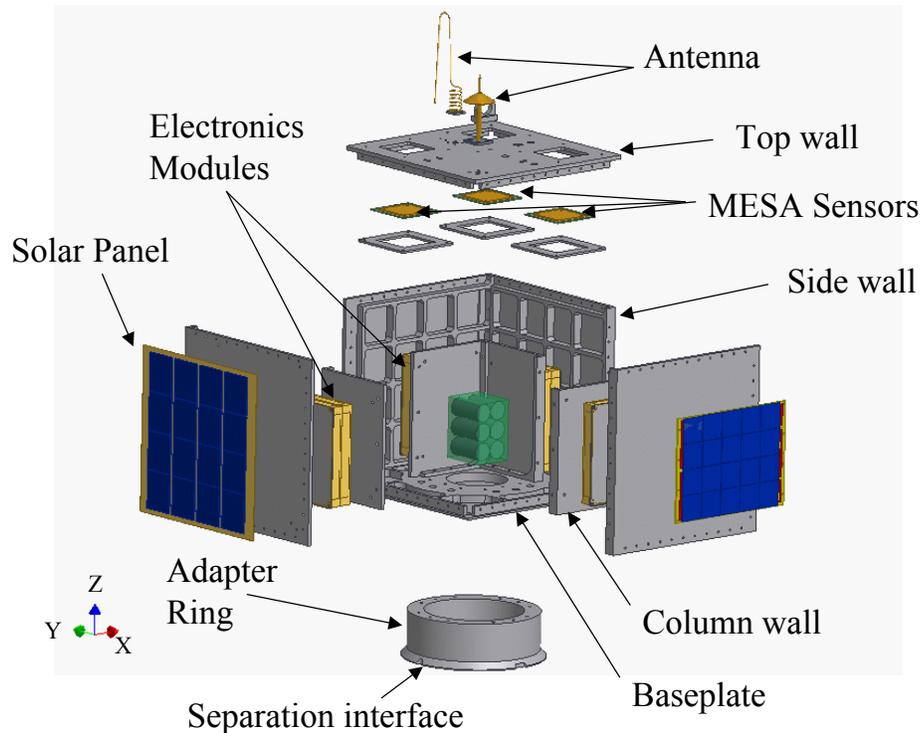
FalconSat-2 Configuration, Exploded View. The spacecraft will fly inside a canister. The cubic structure will bolt to a cylindrical adapter ring, which will attach to the Shuttle's Pallet Ejection System with a band clamp. Once the Shuttle's primary mission is accomplished, the astronauts will open the lid of the canister, and FalconSat-2 will eject.
